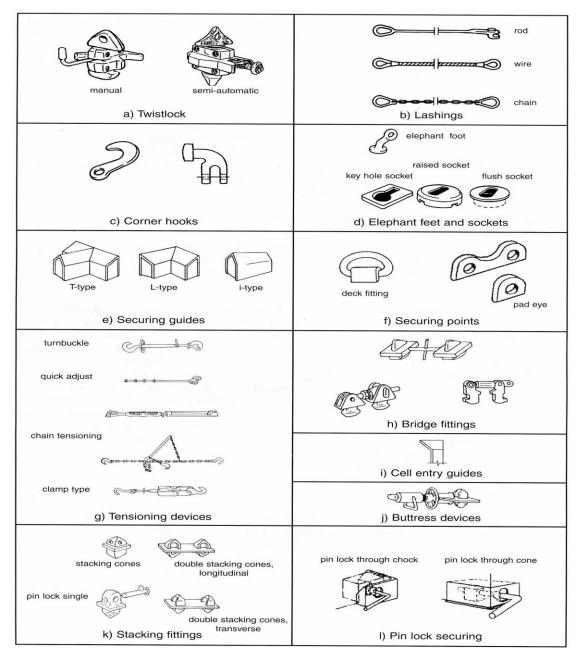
Examples of typical securing and lashing Equipment (ISO 3874 Figure 22).
